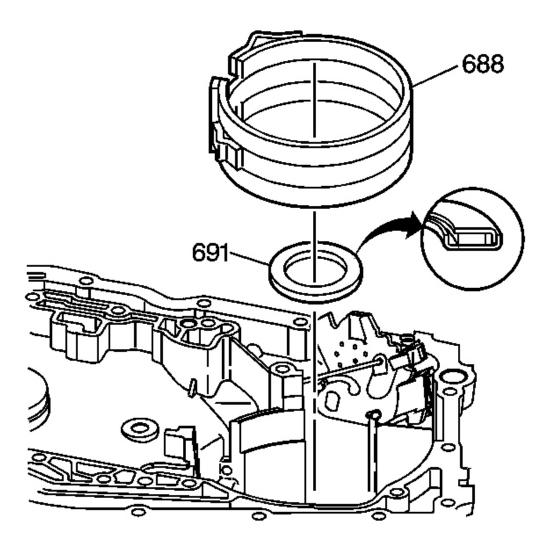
Identifying Forward Band Assembly & Bearing Courtesy of GENERAL MOTORS CORP.
